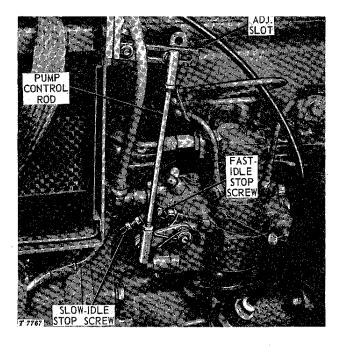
Engine Speed Adjustments (Tractors Ser. No. 29001-Up)
